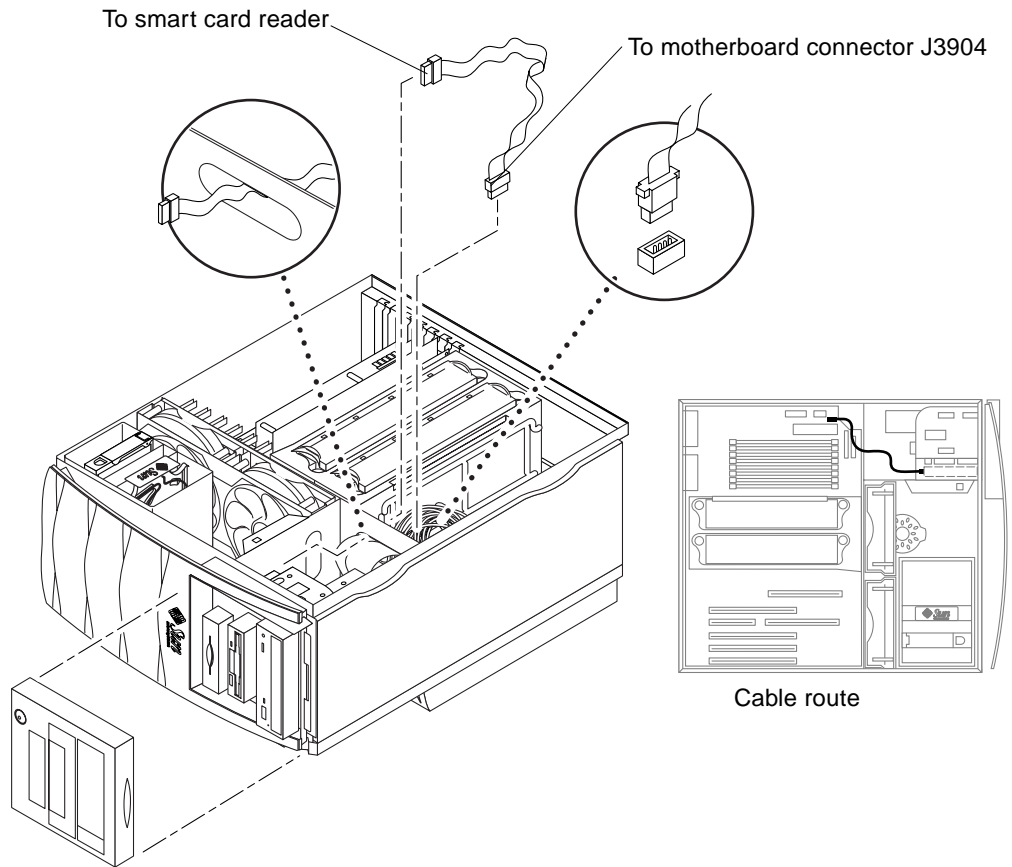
Removing and Replacing the Smart Card Reader Cable Assembly
